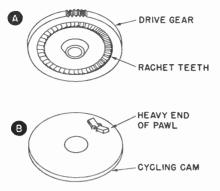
A gravity clutch mechanism using a ratchet and pawl.
